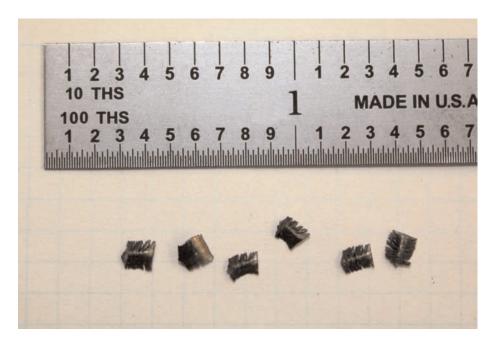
Typical Burrs as Removed from Hex Key Socket
